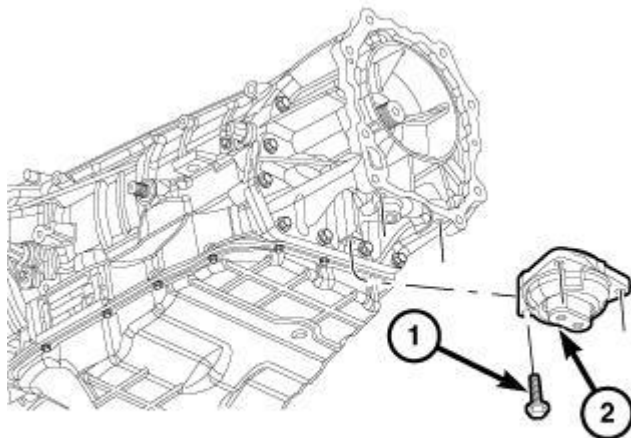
Rear Engine Mount Isolator, Transmission Crossmember Support Brackets & Bolts
